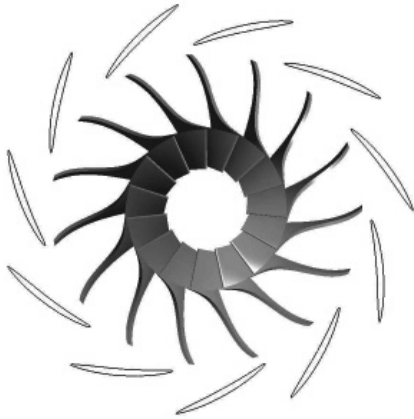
Full 2-D View of the Impeller and Vane Geometry
